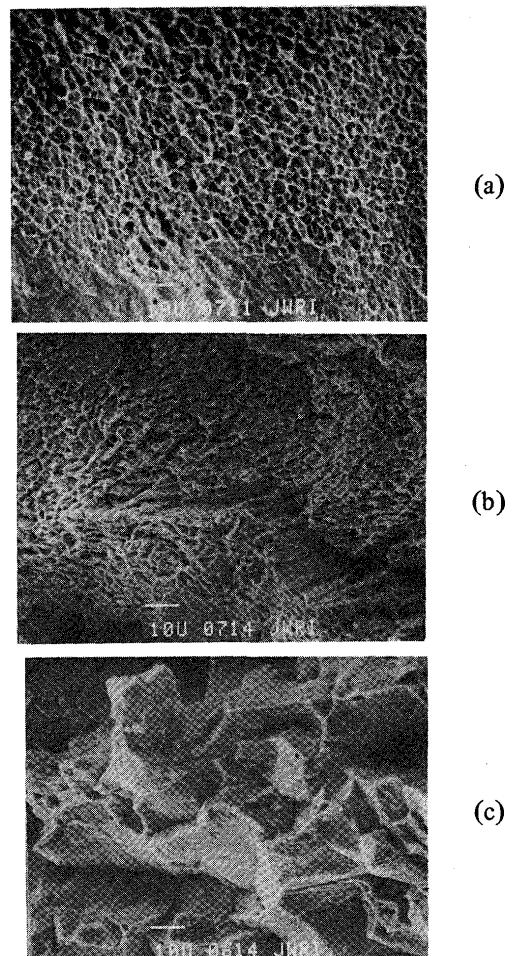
Fractographic investigations of center of fractured surface of tensile tested specimen of EBW joint
